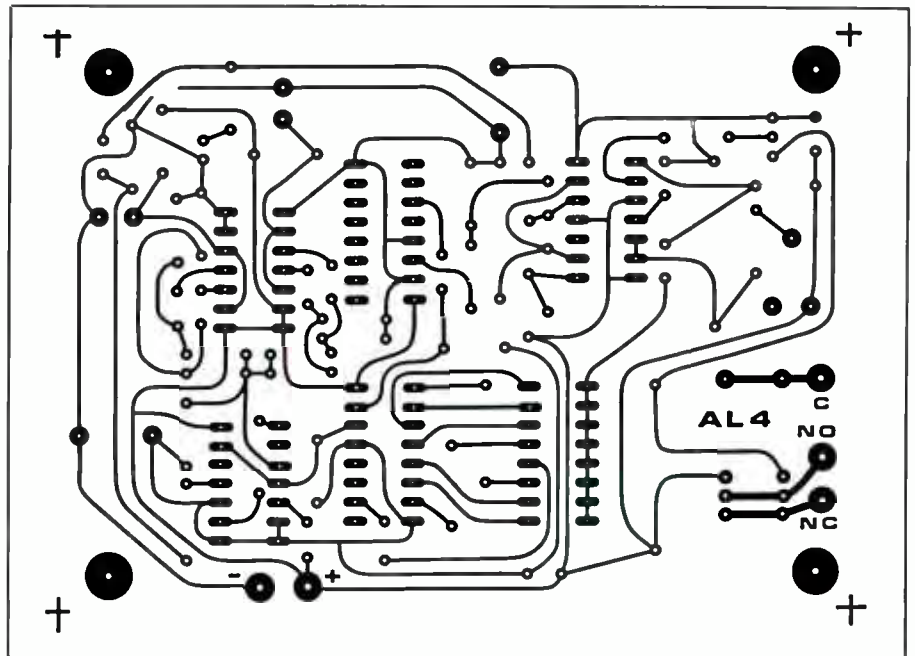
Actual-size etching-and-drilling guide to use for fabricating printed-circuit board.
